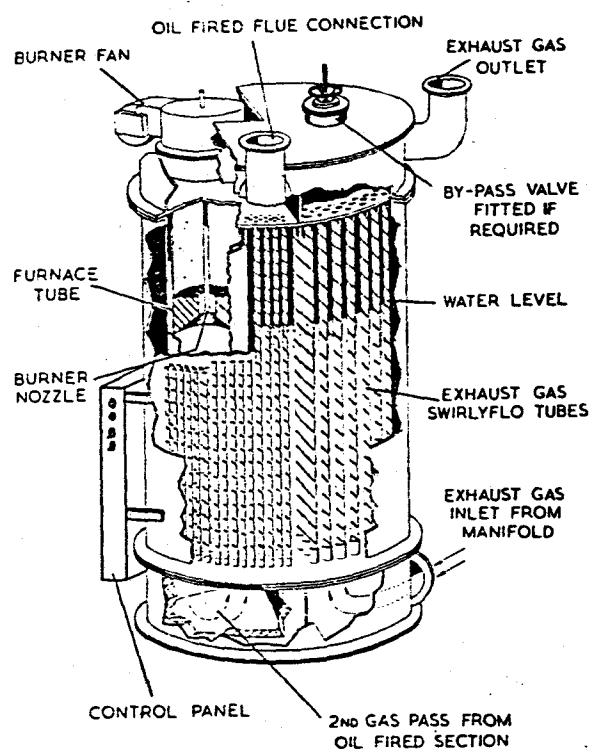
SECTIONAL VIEW OF SPANGER COMPOSITE BOILER
